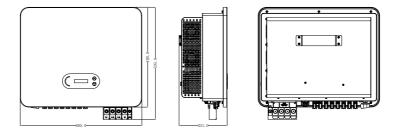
Front, side and back of the machine (take 50KW for example)
